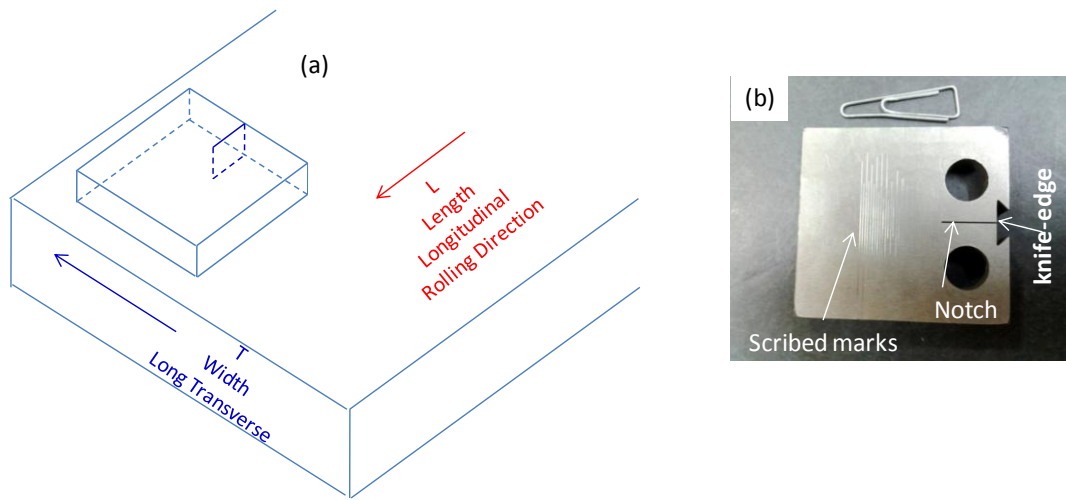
(a) Schematic illustration of orientation of specimen extraction from plates and (b) photograph of CT specimen with knife-edge, fatigue starter notch and scribed marks used for fatigue crack growth testing.
